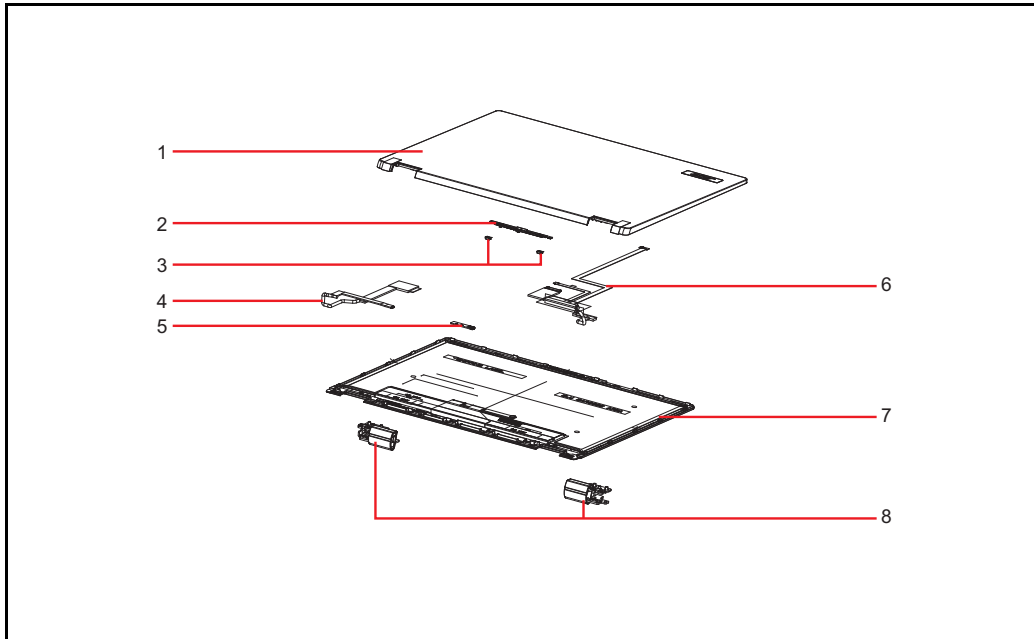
LCD Assembly Exploded Diagram (Convertible Model)
